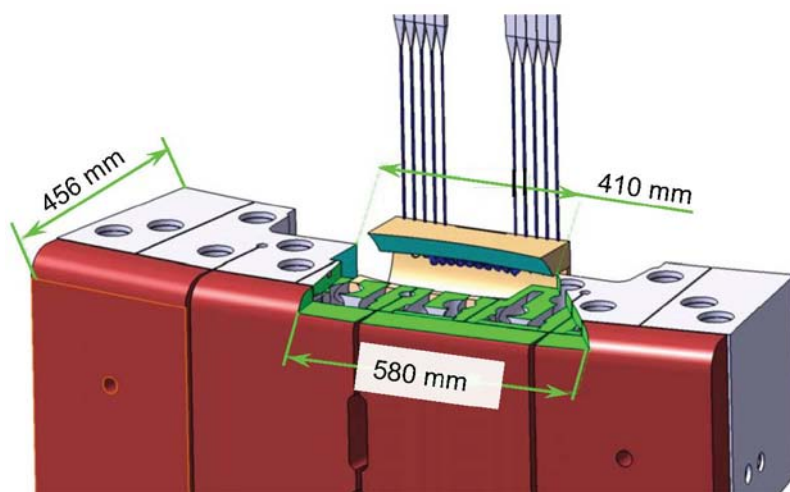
The dimensions of the blanket #3 cut-out for the HFS-FS receiver.
